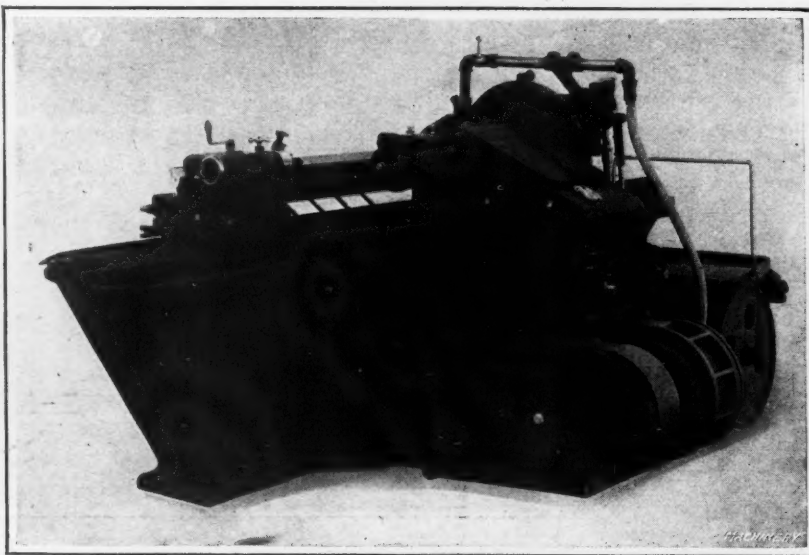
Rear View of Norton Cylindrical Grinding Machine, showing Electric Motor Drive
